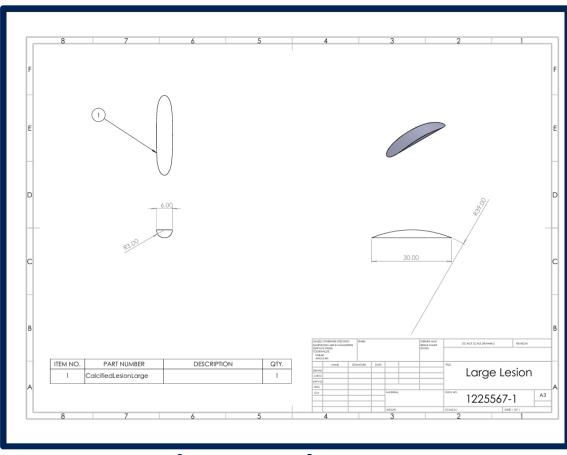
Drawing of Component [PN: 1225567-1 Large Lesion]
